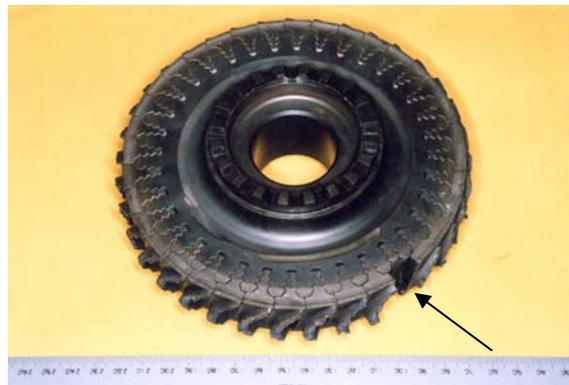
Rear face of the stage-one turbine wheel – missing blade indicated.
